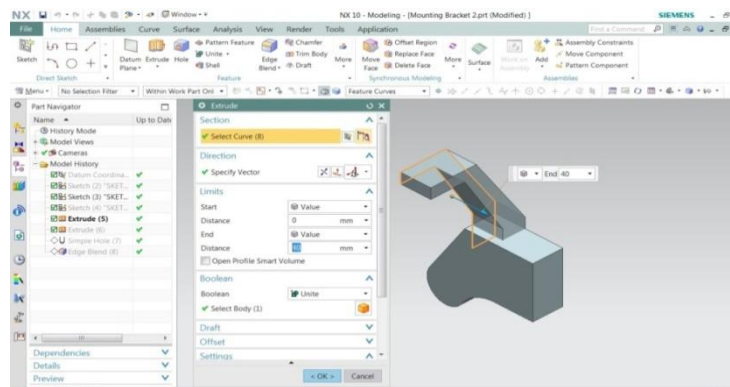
Design of Automotive Engine Mounting Bracket (NX CAD)
